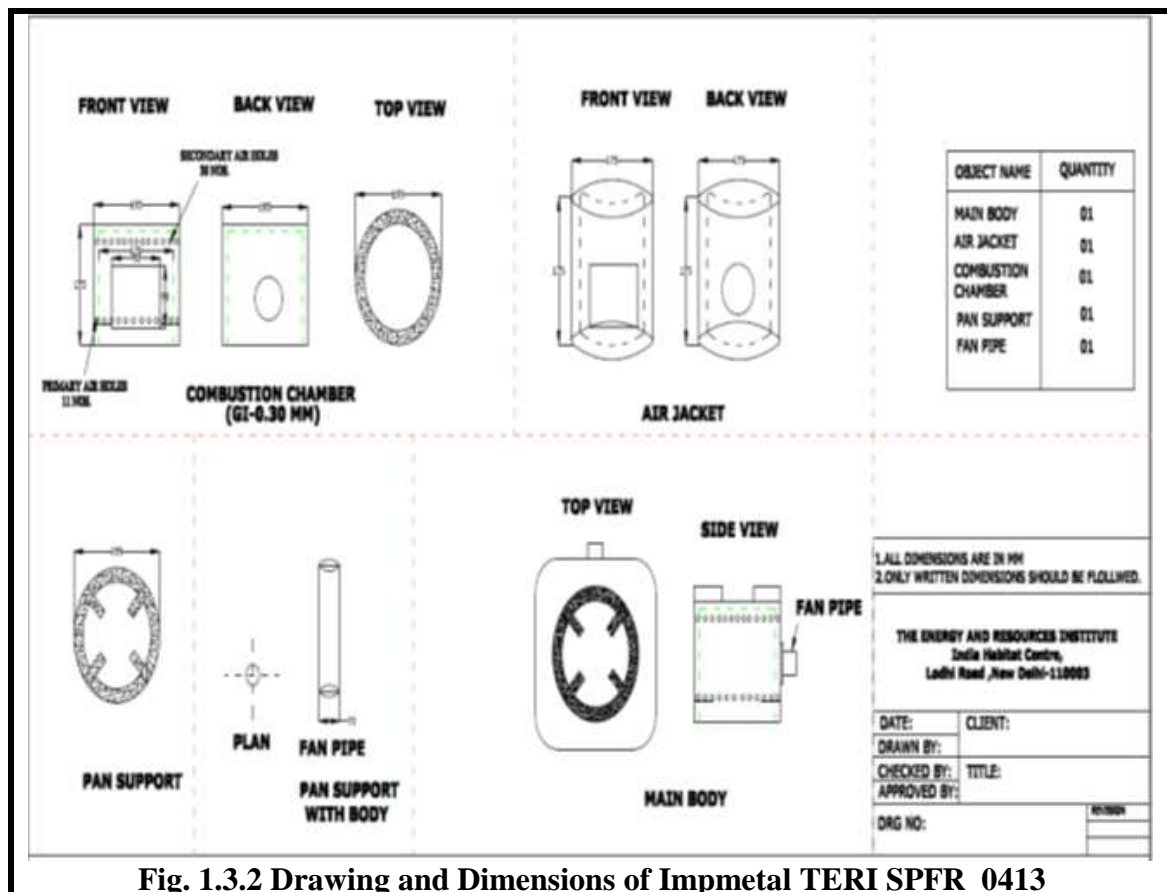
Drawing and Dimensions of Impmetal TERI SPFR\_0413
